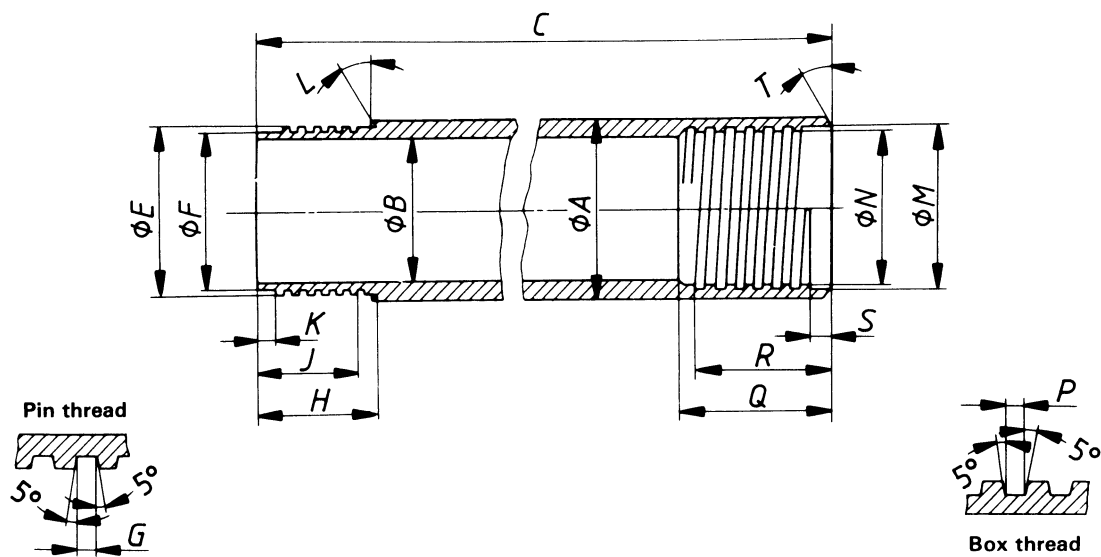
“WF” design double-tube core barrel — Outer tube (see Table 25)
